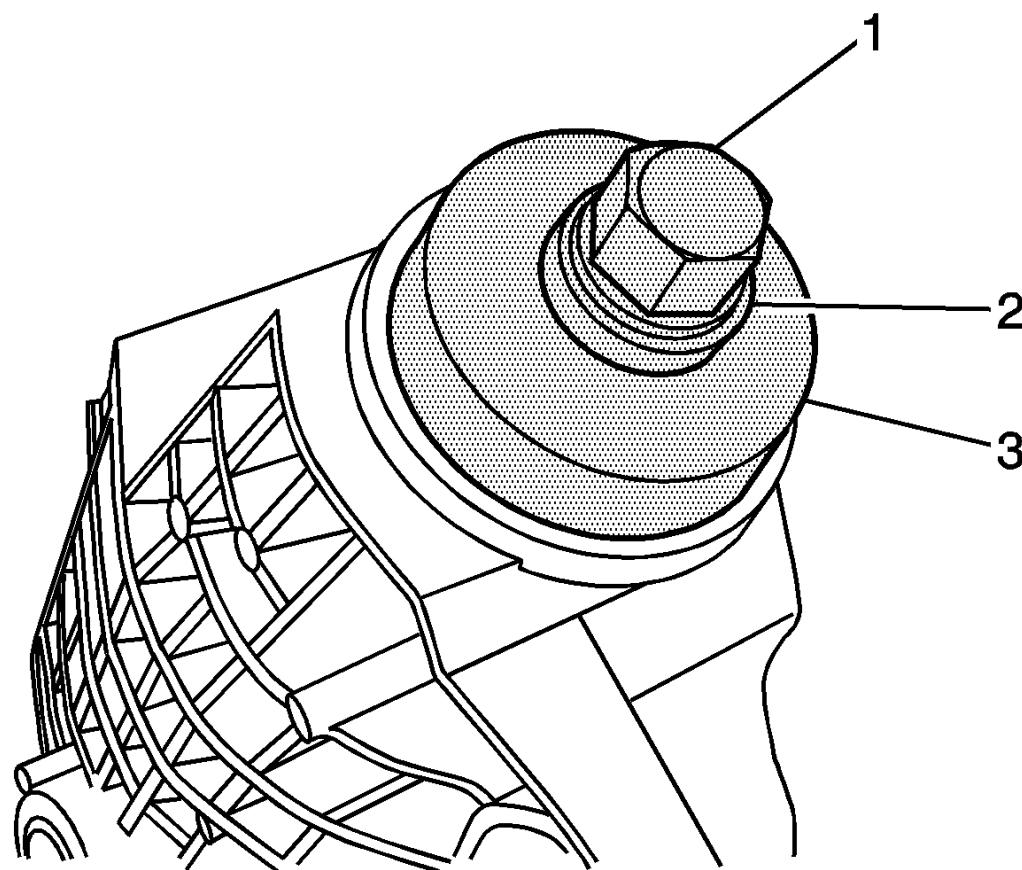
View Of Thrust Bearing & Washer, Forcing Screw & Special Tool J 45858-3
